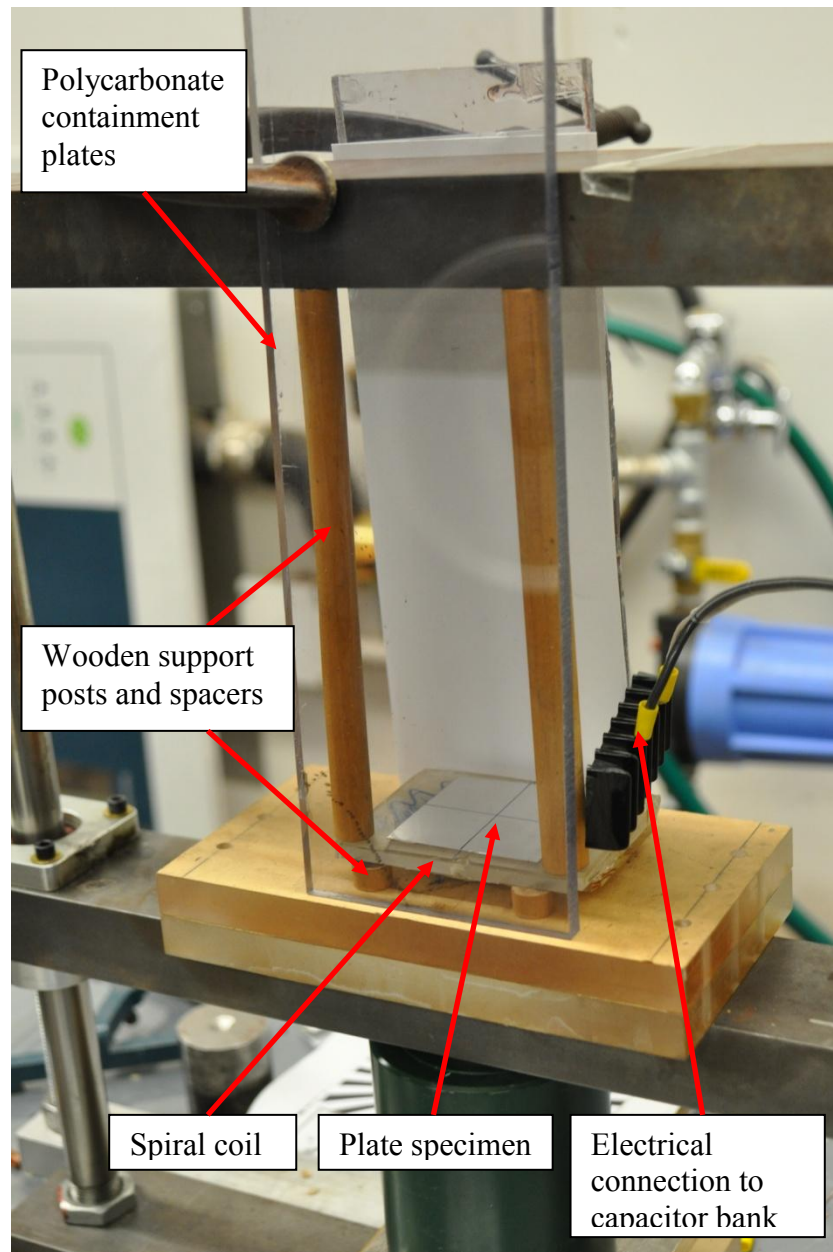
Close-up view of sample containment assembly for flat plate acceleration experiments
